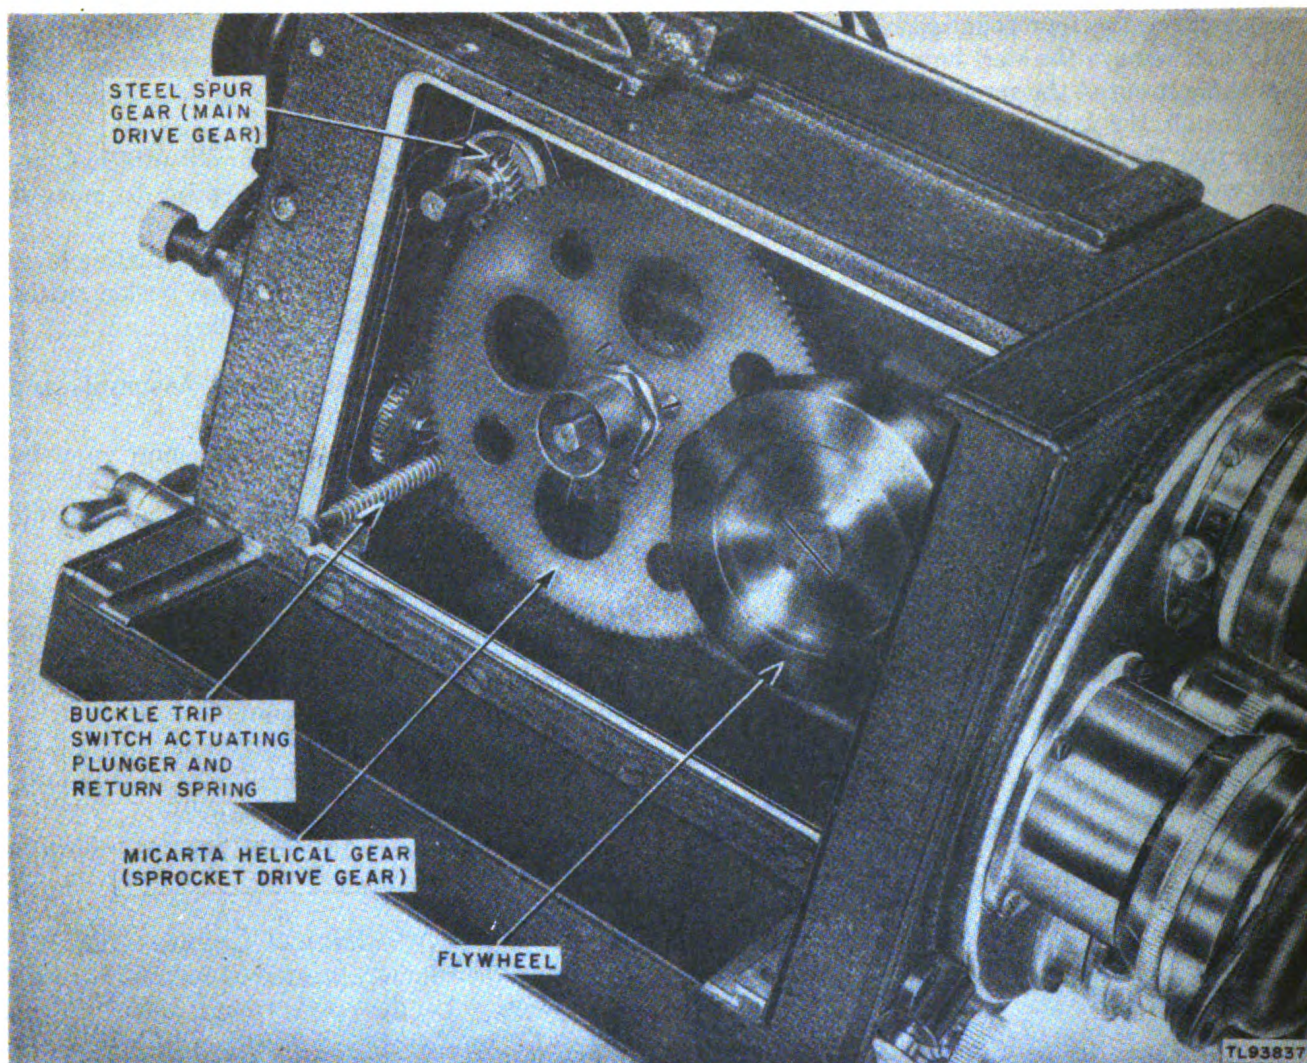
Right side of camera box, showing buckle switch trip unit partially removed.
